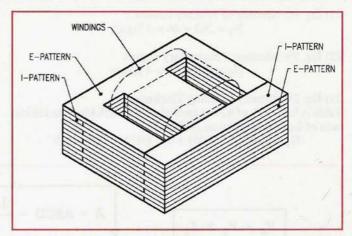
Transformer core stack assembly, using the "E" and "I" shaped metal pieces cut from the blanks shown in figure 1.
